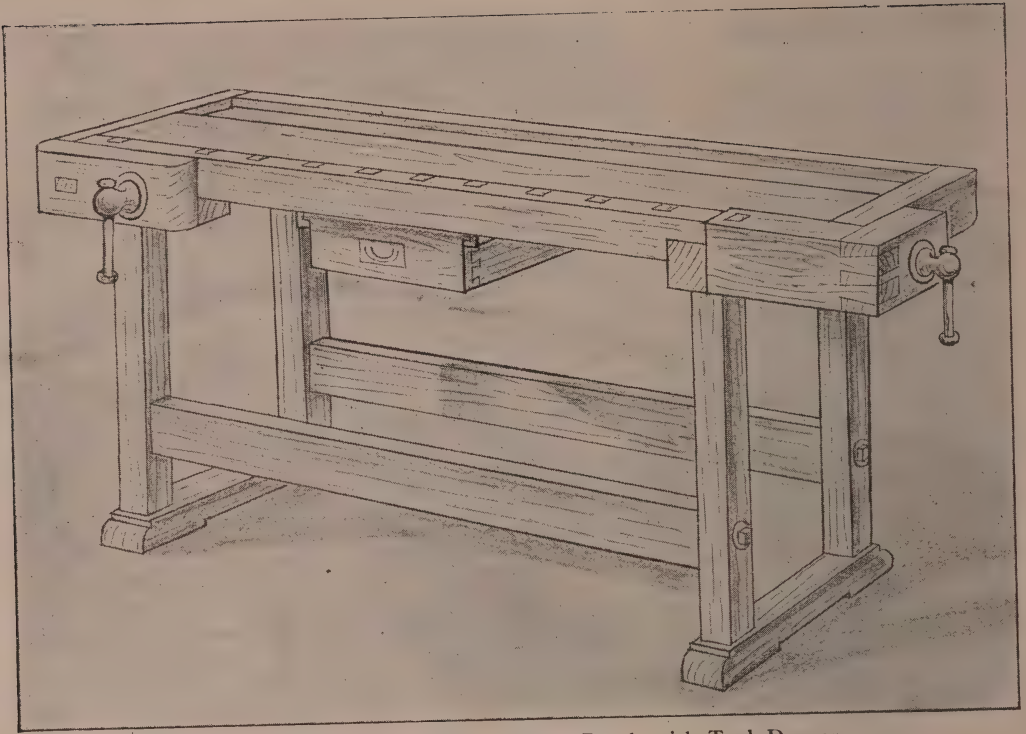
Sketch of Cabinet-maker's Bench with Tool Drawer
